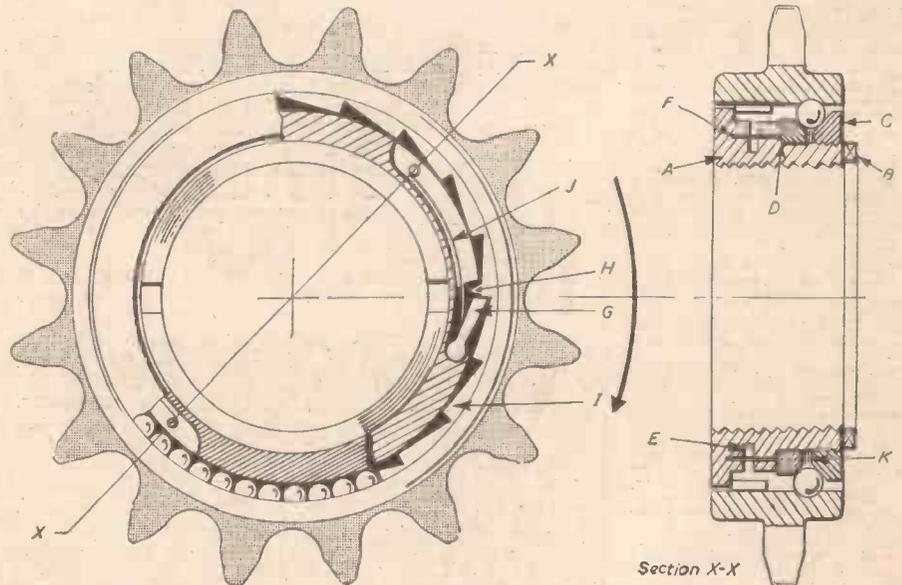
A freewheel cut away to show assembly and a sectional view.
